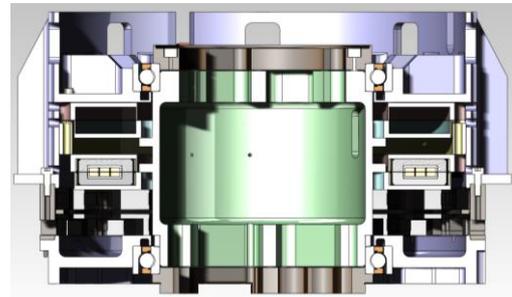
Core Bearing Subassembly CAD cross-section - Debris management voids are visible inboard of the bearings.
